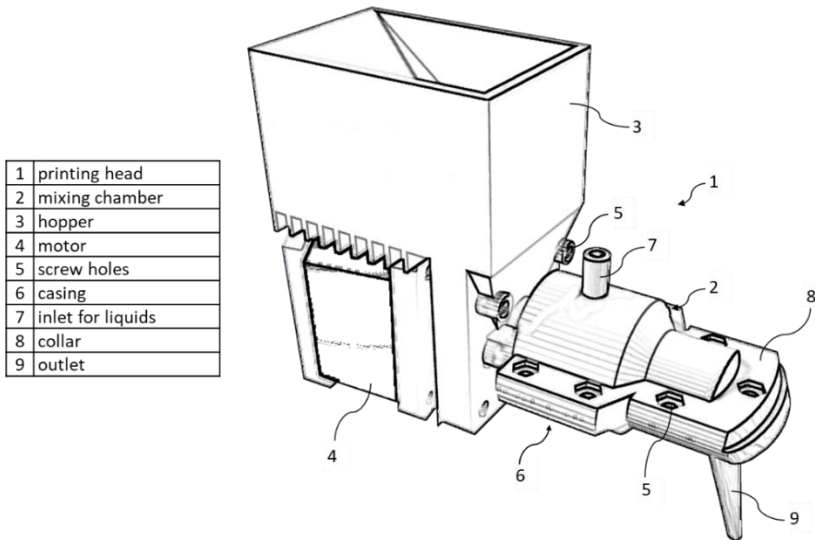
Three-dimensional view of the mixing chamber, hopper and motor
